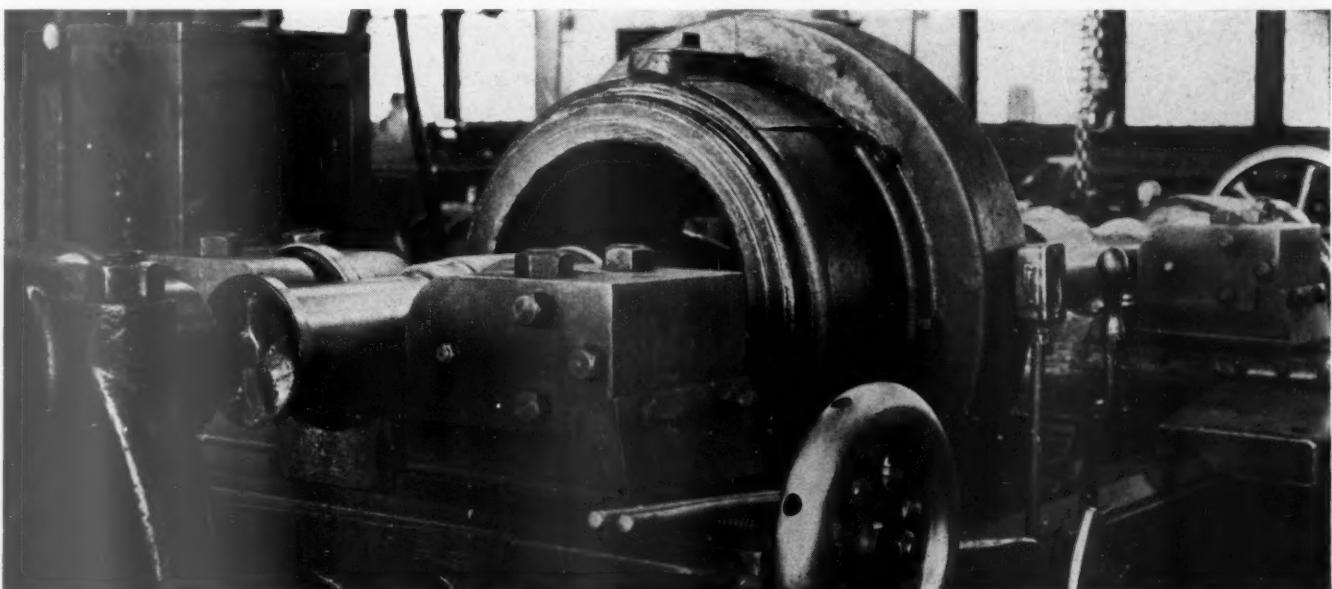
Heavy-duty journal-burnishing lathe equipped with large double-acting rolls to relieve the lathe centers
